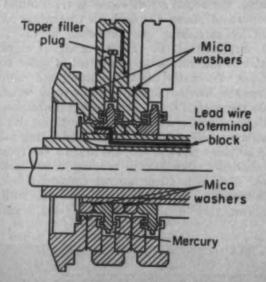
Above-Details of mercury slip-ring unit shown in Fig. 6. The rotating copper ring is immersed in mercury, giving better contact than from conventional brushes
